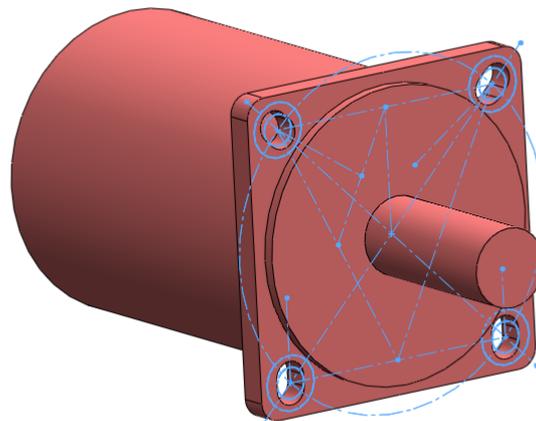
Proposed motor flange "standard" to use four slots instead of holes for split groove kinematic mounting to achieve axis alignment.
